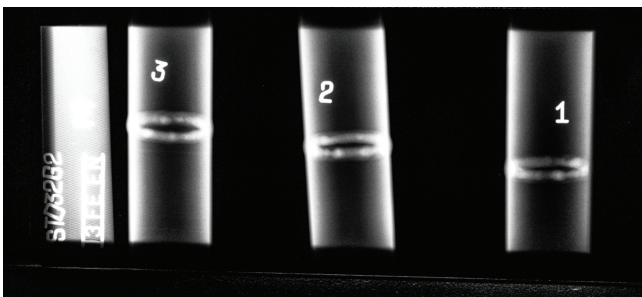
Sample radiograph of radiographic examination of end-to-end joints of welded pipes joined by a butt weld
